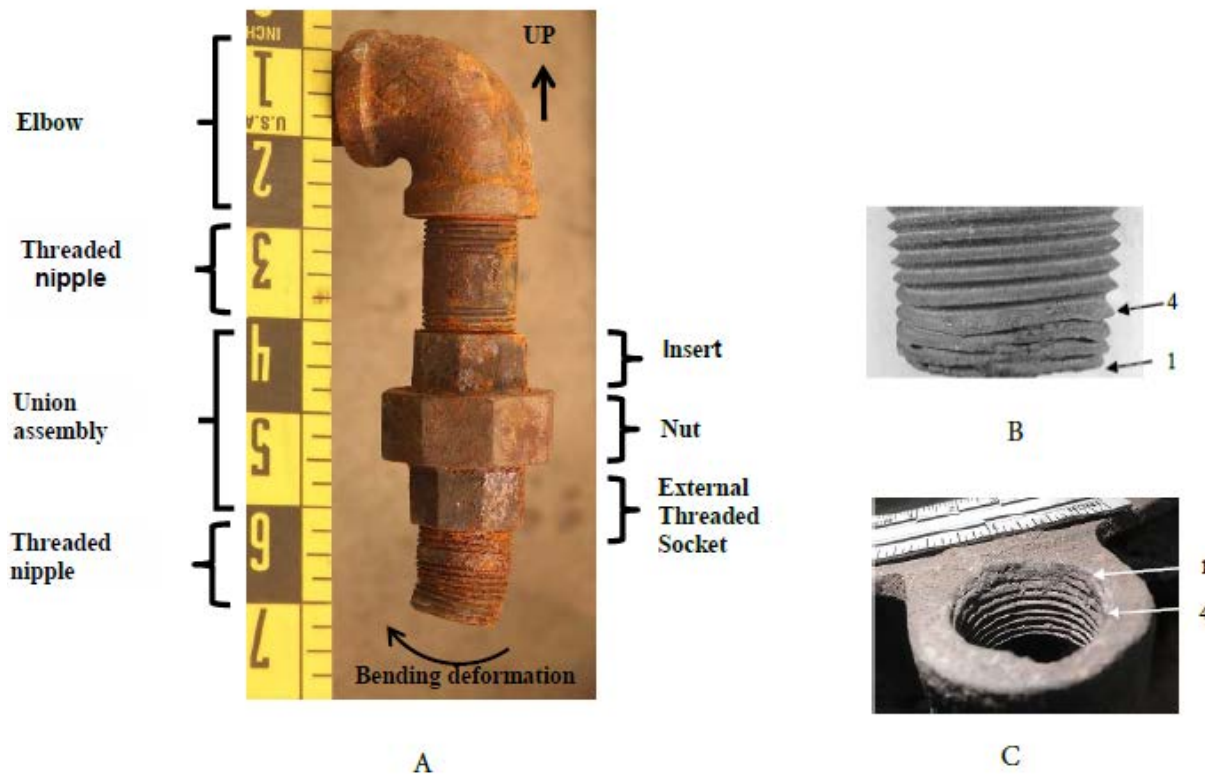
A photograph of the exposed external threaded nipple from the upper regulator union assembly.
